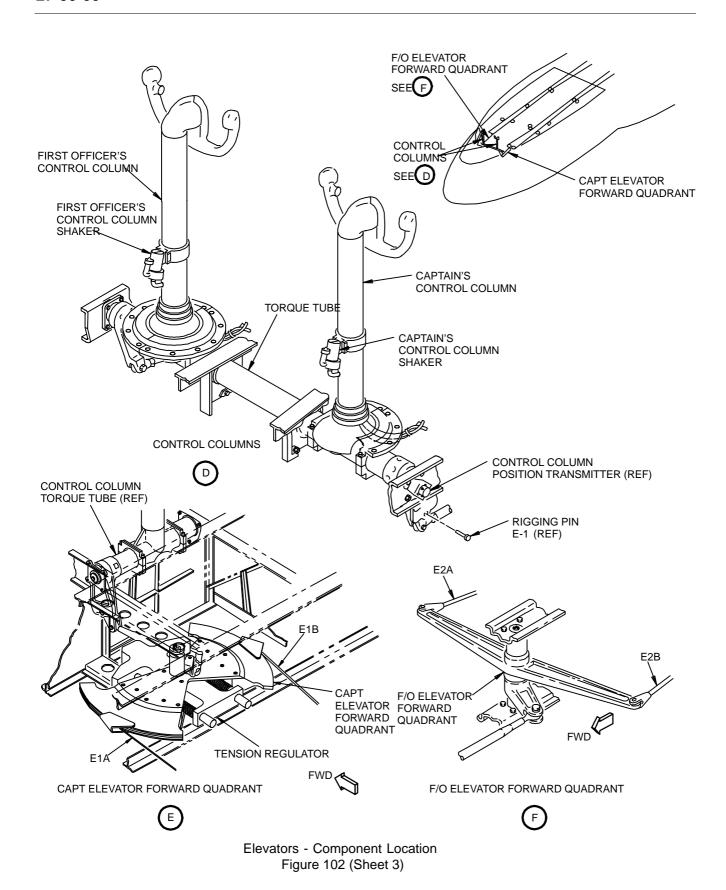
27-30 Elevators Comp. Location Fig. 102 (Sheet 3)
